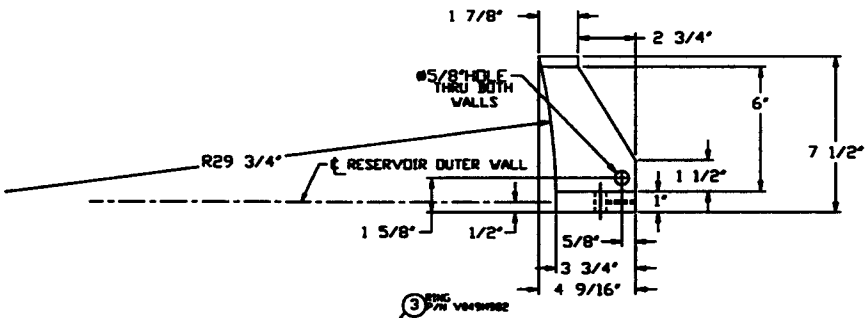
STAMP P/N HEAT/LOT NO. ON ONE SIDE
